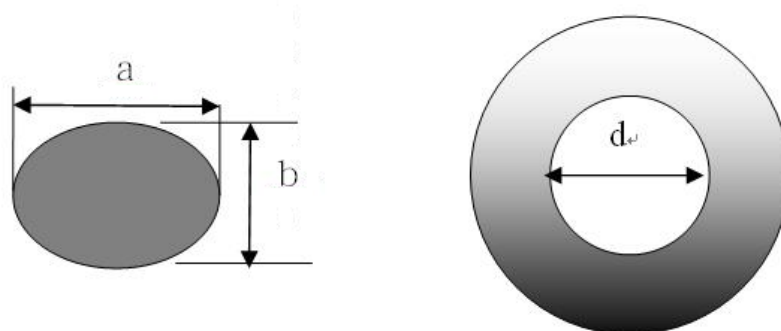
Sectional shape design of the elliptic mandrel and extrusion die
